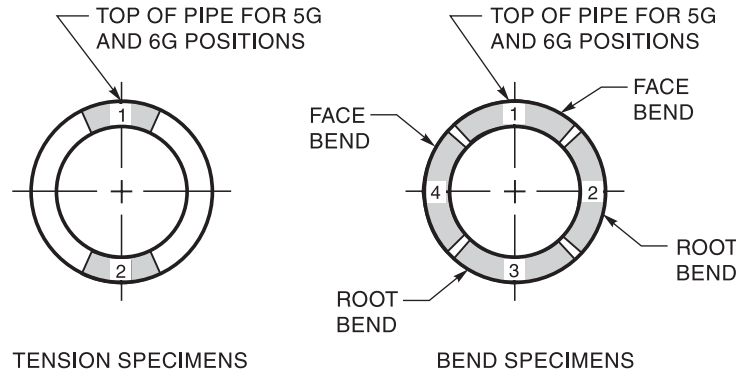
A—Location of Test Specimens on Welded Test Pipe
